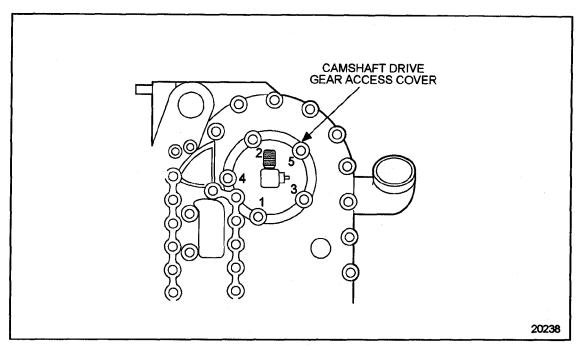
Camshaft Drive Gear Access Cover Bolt Tightening Sequence
